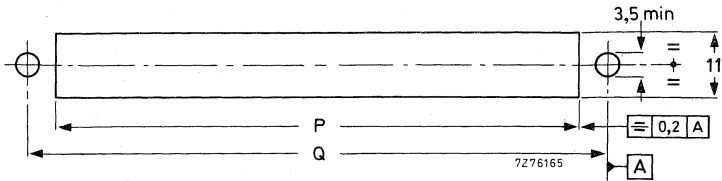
Panel cut-out; see Table 3 for dimensions P and Q.
